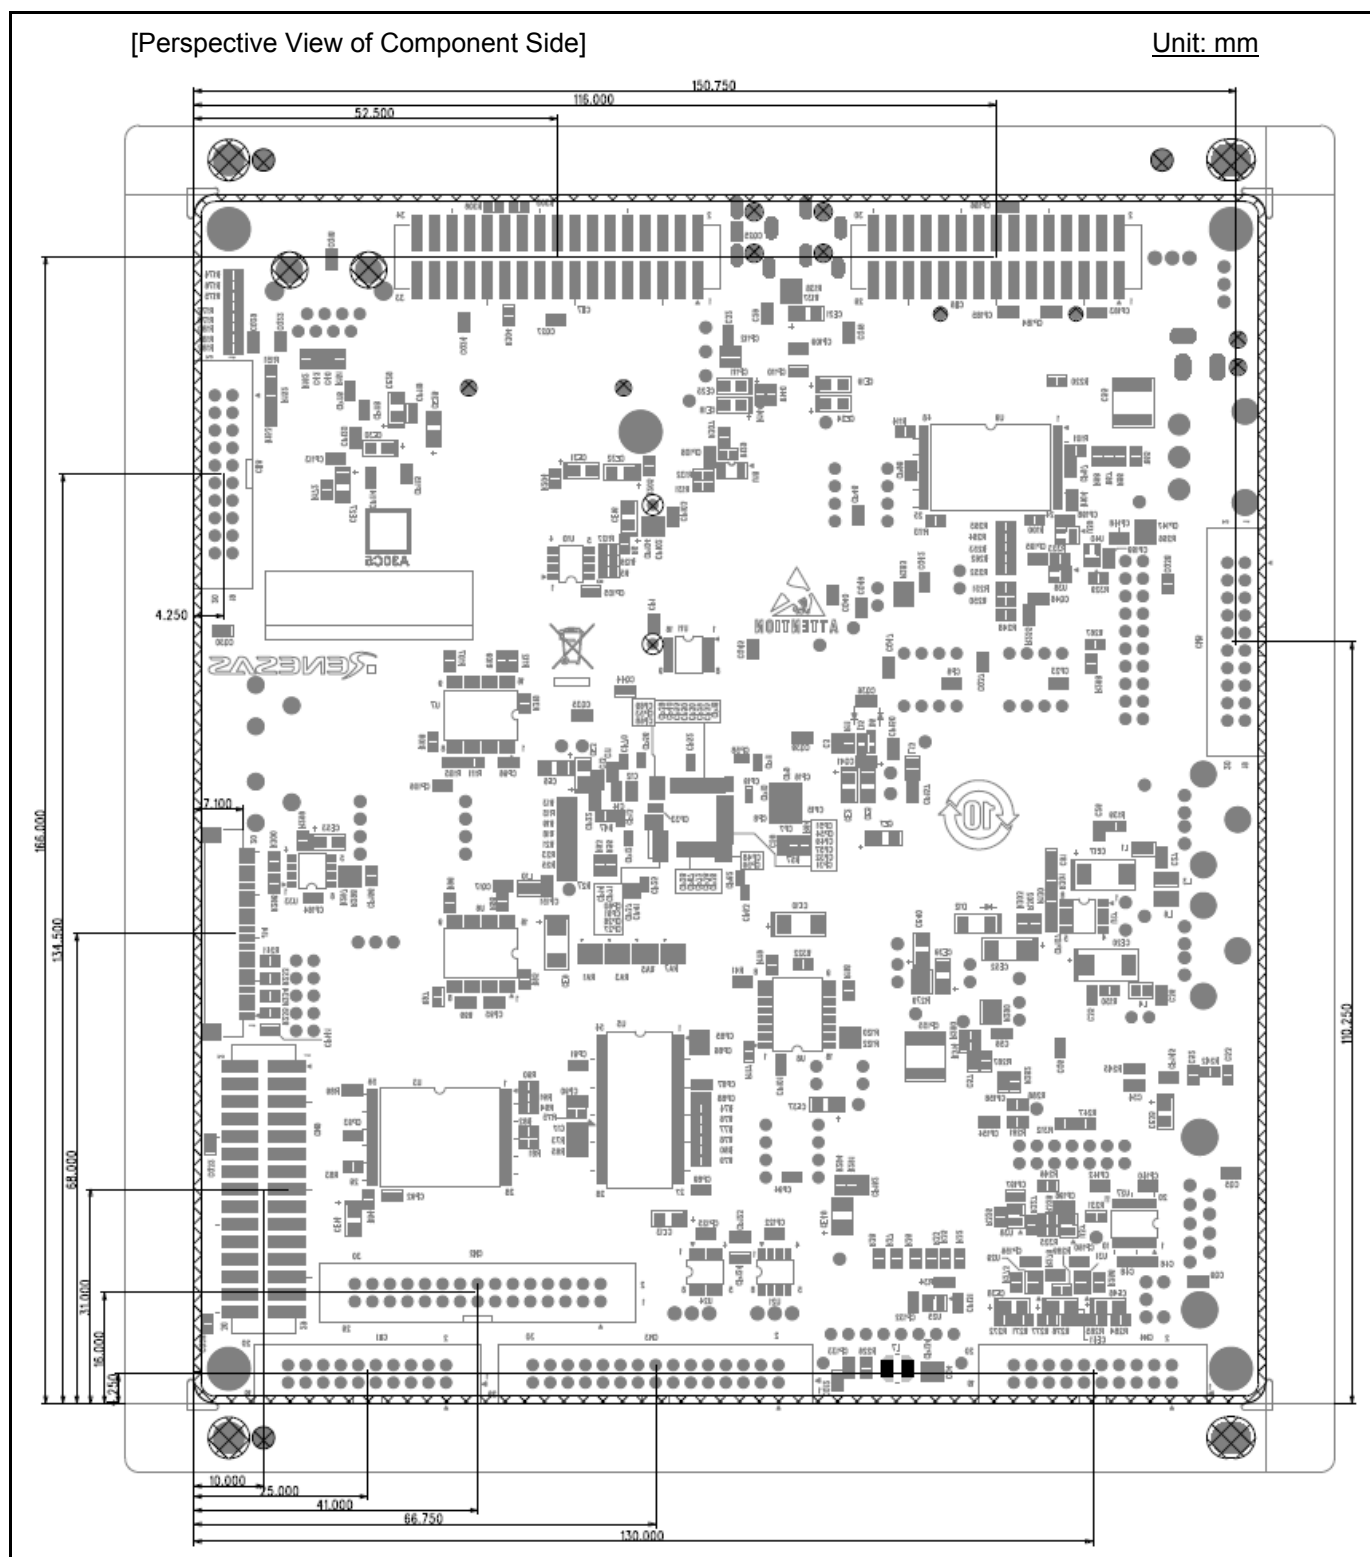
RTK772100BC00000BR Dimensions 3 (Perspective View of Component Side)
